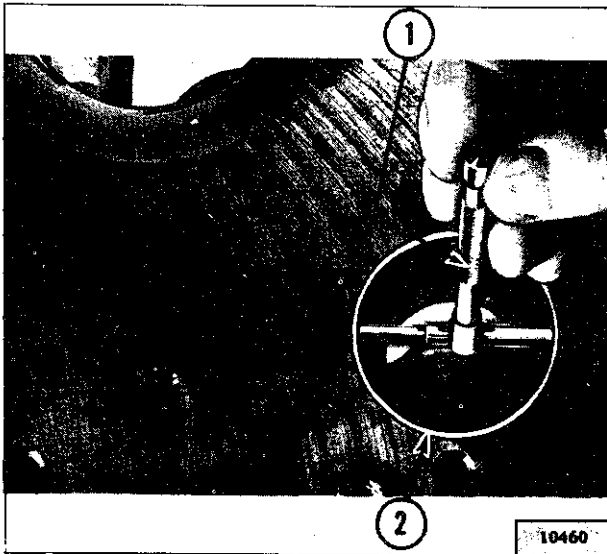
CHECKING CAMSHAFT BEARING INSIDE DIAMETER
